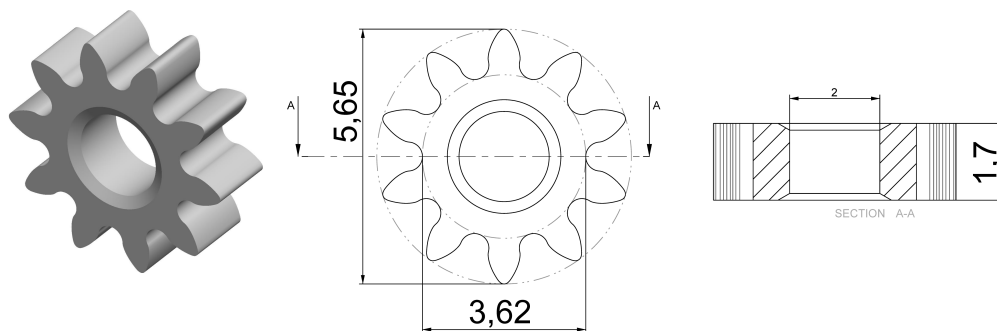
Technical drawing of the gear wheel component. Tolerances are ranging between $\pm 20\text{-}50\ \mu\text{m}$.
